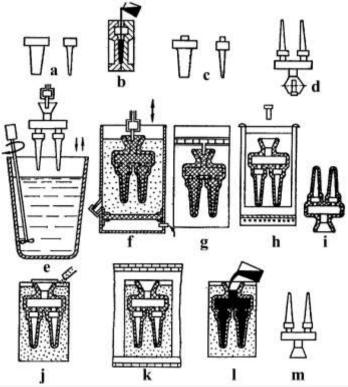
Investment casting process: a – part; b – pattern-making; c – pattern; d-pattern complete; e – dipping in suspension; f – dipping in fluidized sand; h – chemical drying; i – removing the pattern mix; j – setting of the block into steel box; k – heating of box; l – pouring of a metal; m – castings with gating system - settling of shell moulds into steel box and filling box by sand;
